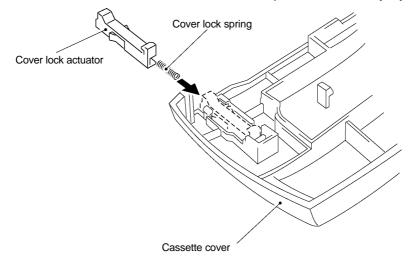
Reassembly of the Cover Lock Actuator
